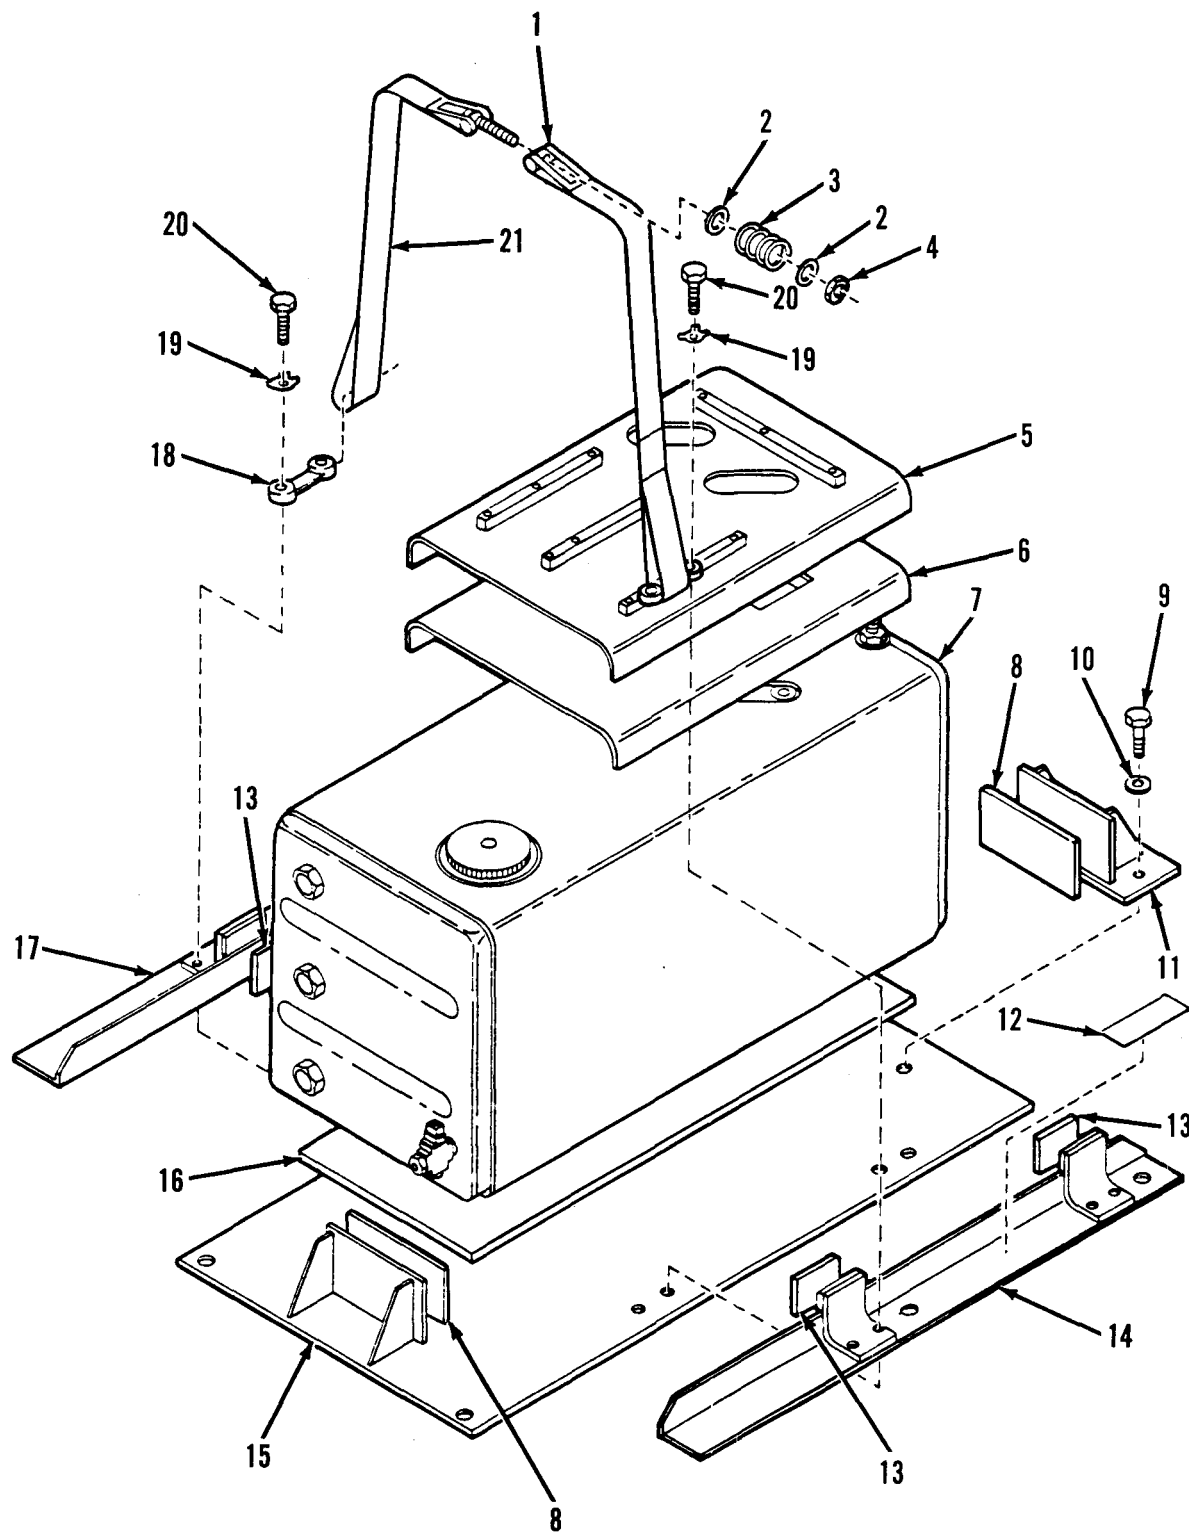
Tank Unit, Liquid Dispenser, 31-15-2805
